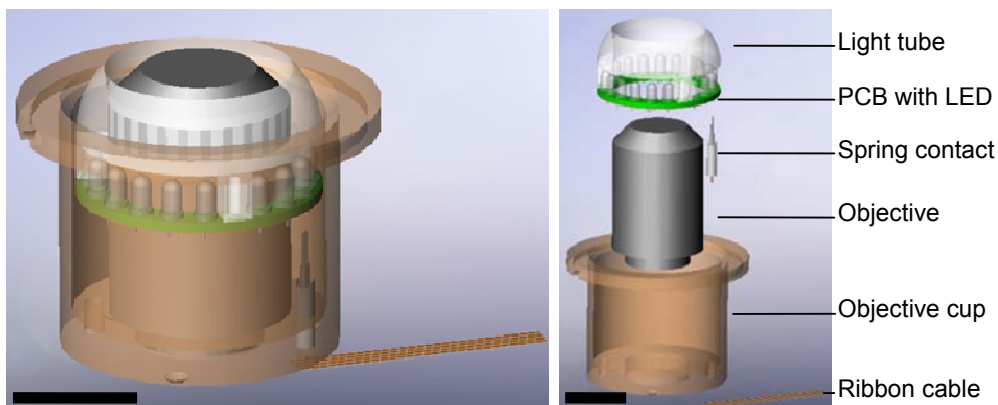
Dark field illumination design for the iMic. (left) Assembly including a ribbon cable attached to the objective holder (not shown in the image). (right) exploded view. Black bar indicates 20 mm.
